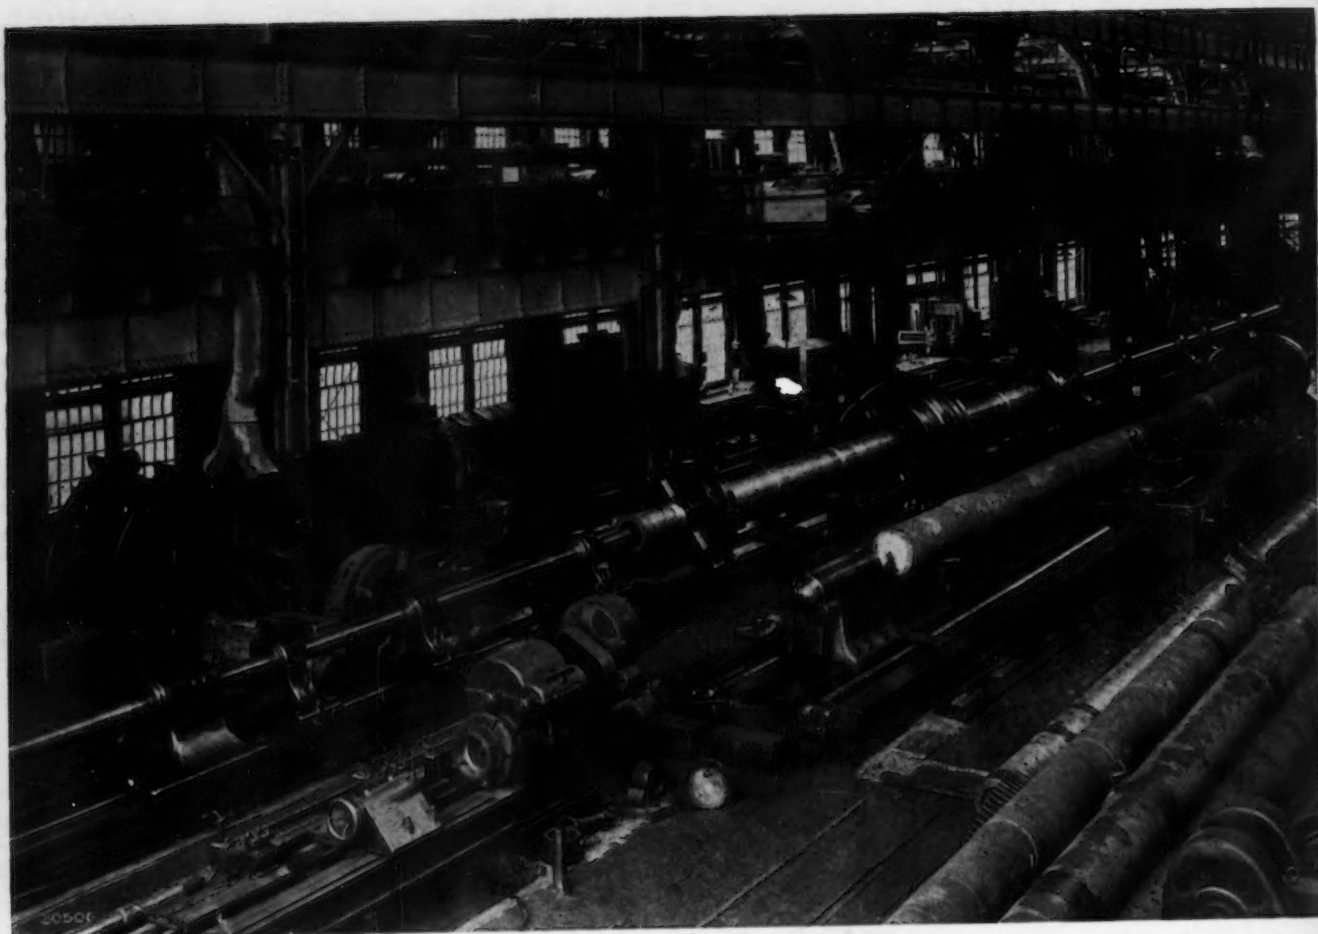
Forgings for gun tubes are rough turned and bored on machines of this type. ▲ ▲ ▲
